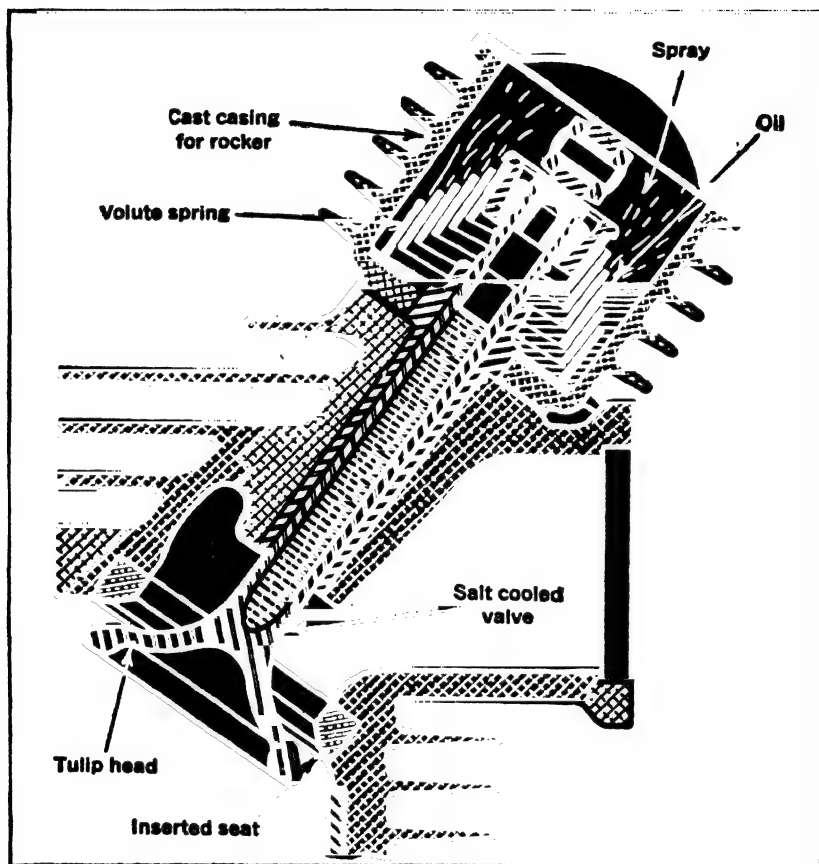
Enlarged Section Through the Exhaust Port of Type K Aircraft Engine Cylinder Showing Housings for Valve Spring and Oil for Cooling the Spring and Insuring Lubrication of Valve Stem Guide.
